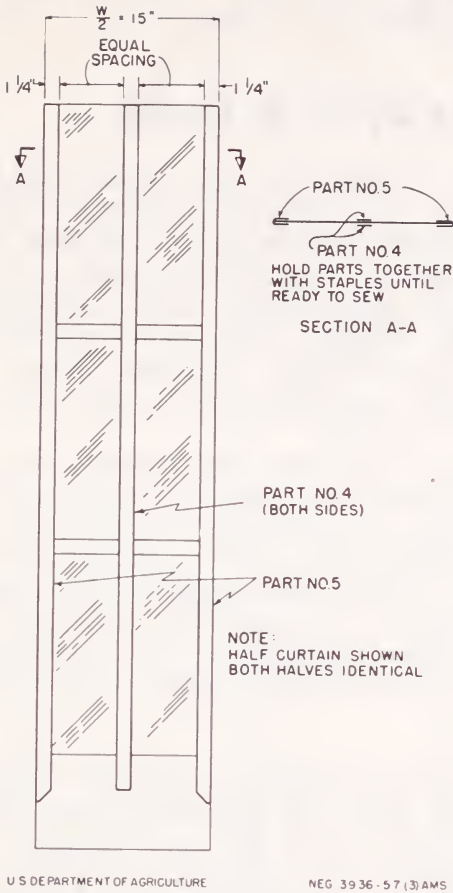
Assembly of parts No. 4 and 5 to curtain for a 30" x 64" door opening.
